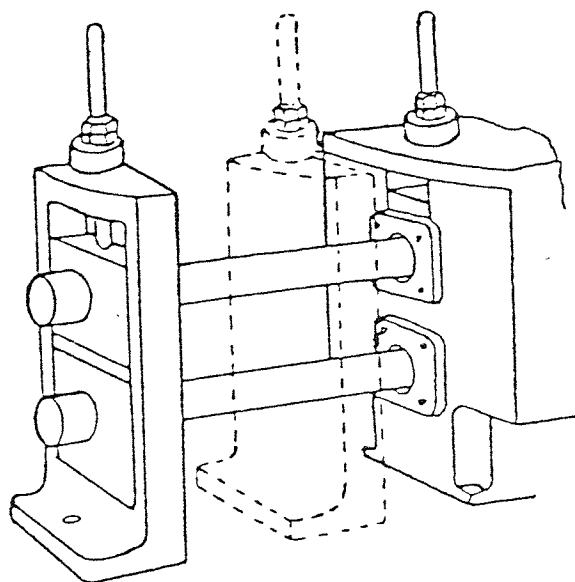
ROLL STATION IN AN INBOARD TYPE ROLL FORMING MACHINE
